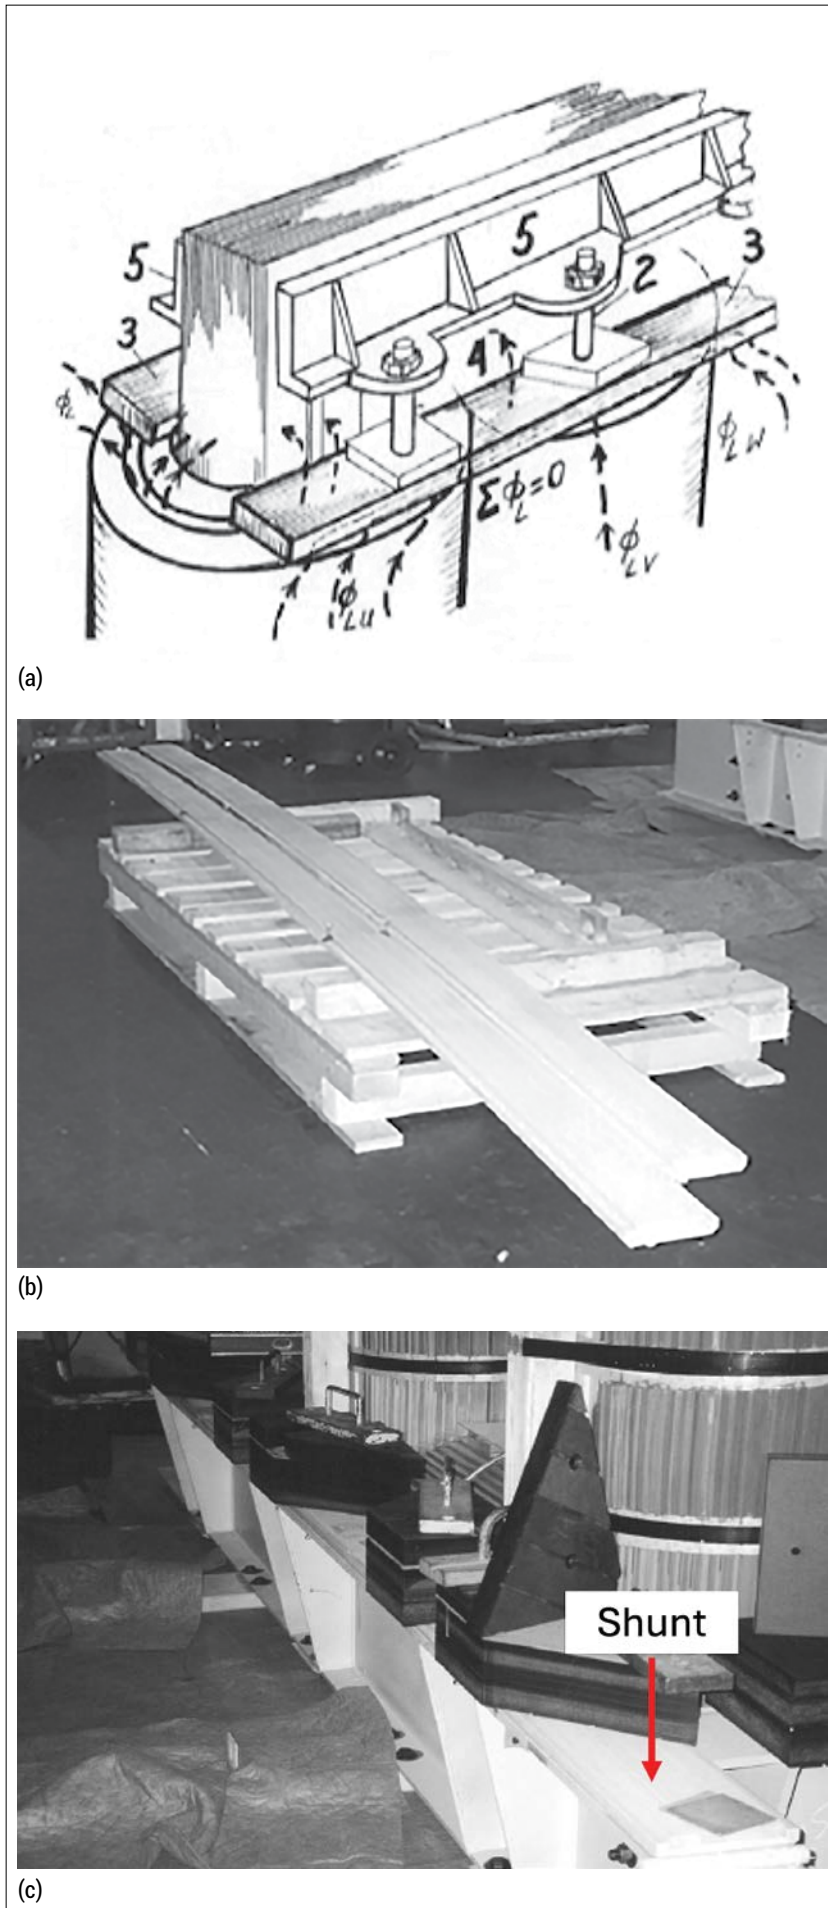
a) Core clamp shunts (#3) [10], b) large core clamp shunts, c) assembly of core clamp shunts.
